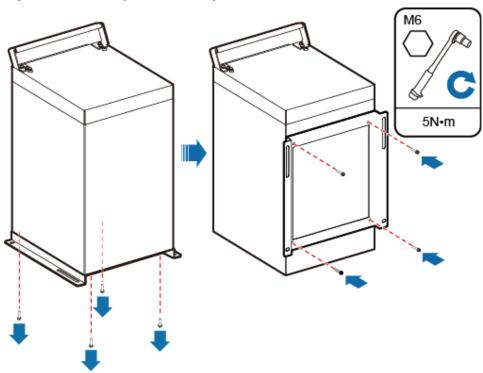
Installing the attachment plate onto the side of the cabinet
